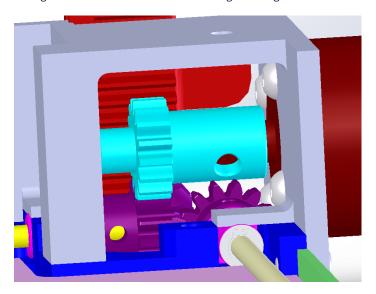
Front face of the machined part containing empty space for access to the bottom right screw.
